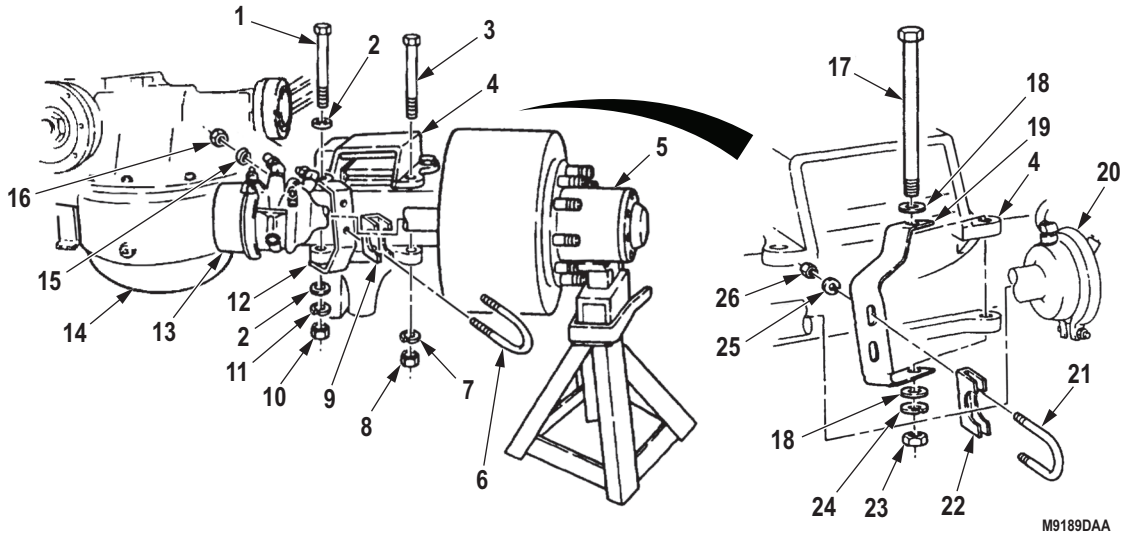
Rear Axle Spring Seat Wear Pads and Upper Bracket Removal.
